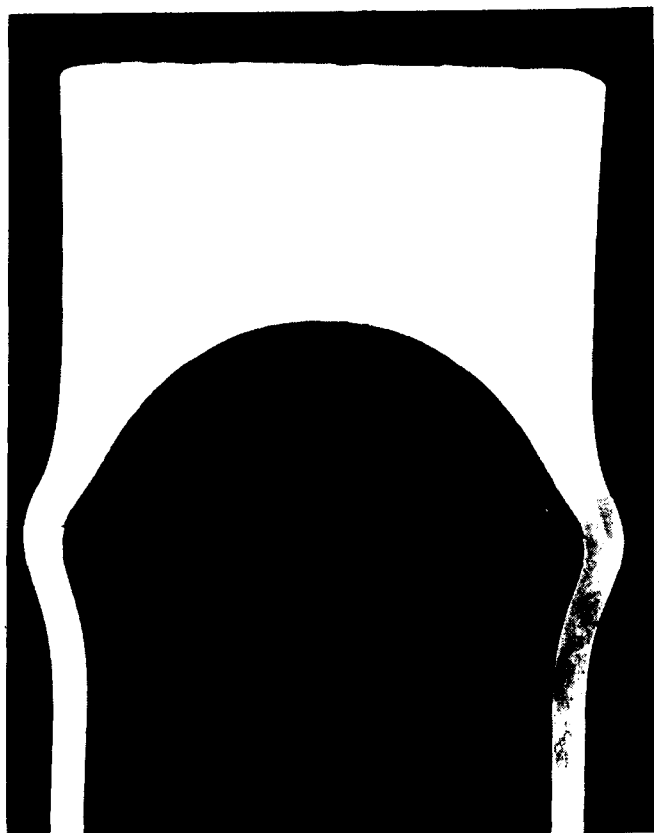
Section-View of Penetrator With Shallow Control Groove in Primary Failure Zone (P-46S) After Impact on Concrete Target at 2320 ft/s.
